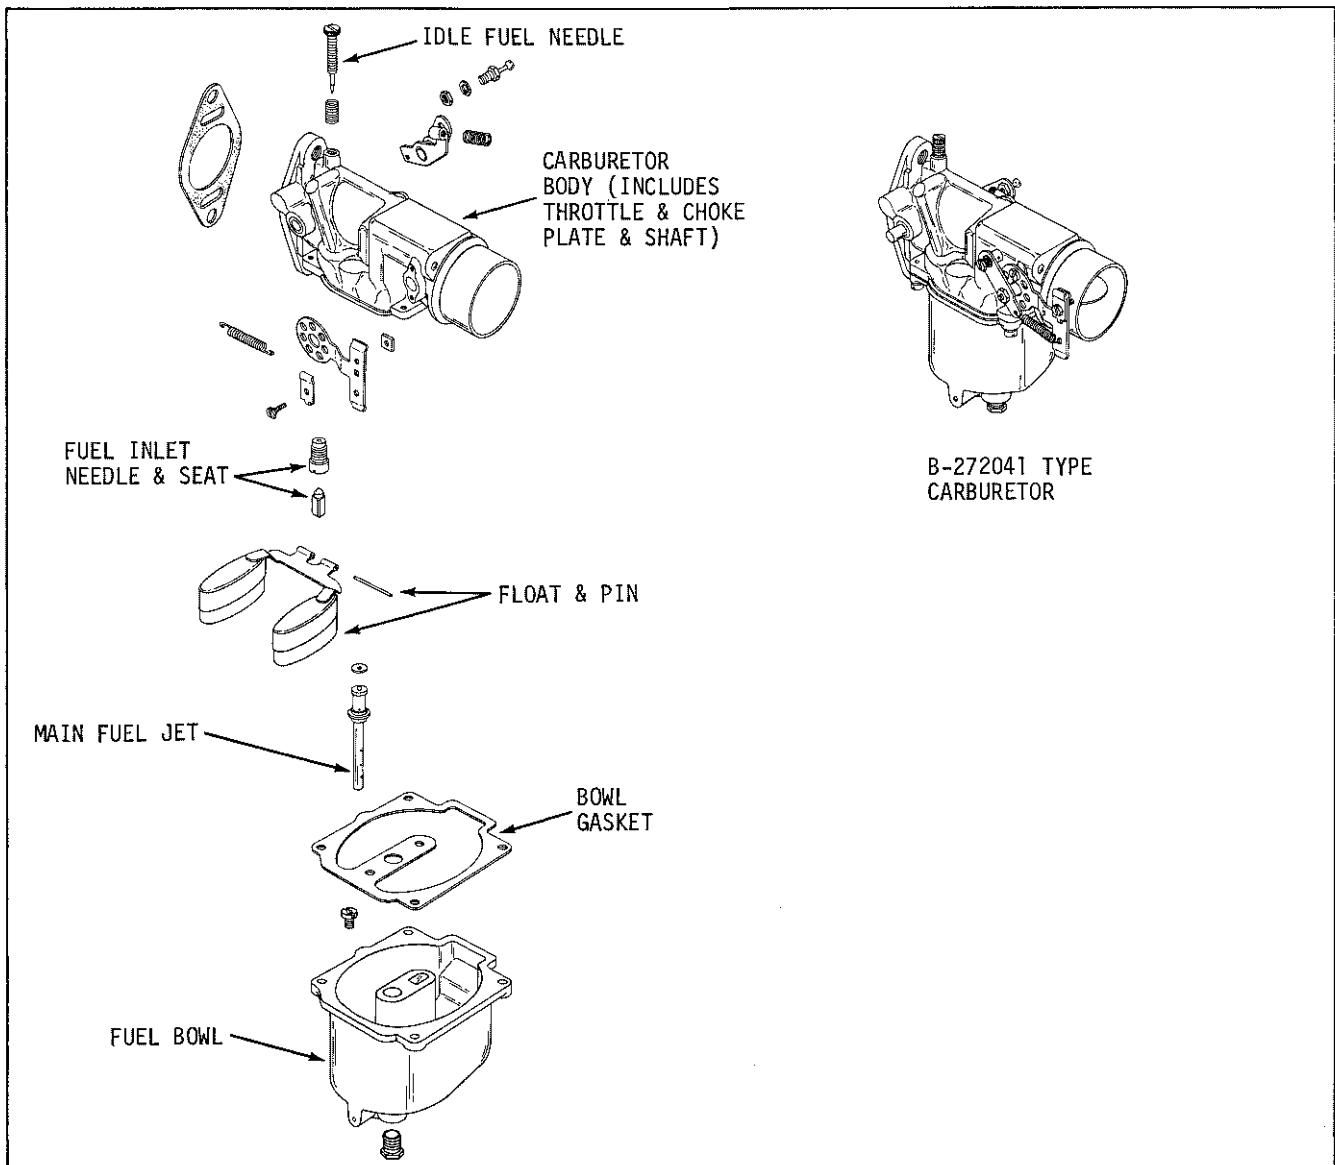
DISASSEMBLED VIEW -- B-272041 TYPE FIXED JET CARBURETOR
